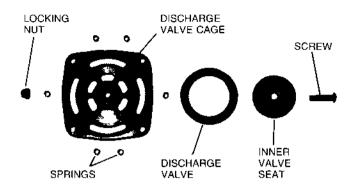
B —CURRENT DISCHARGE VALVE CAGE ASSEMBLY
